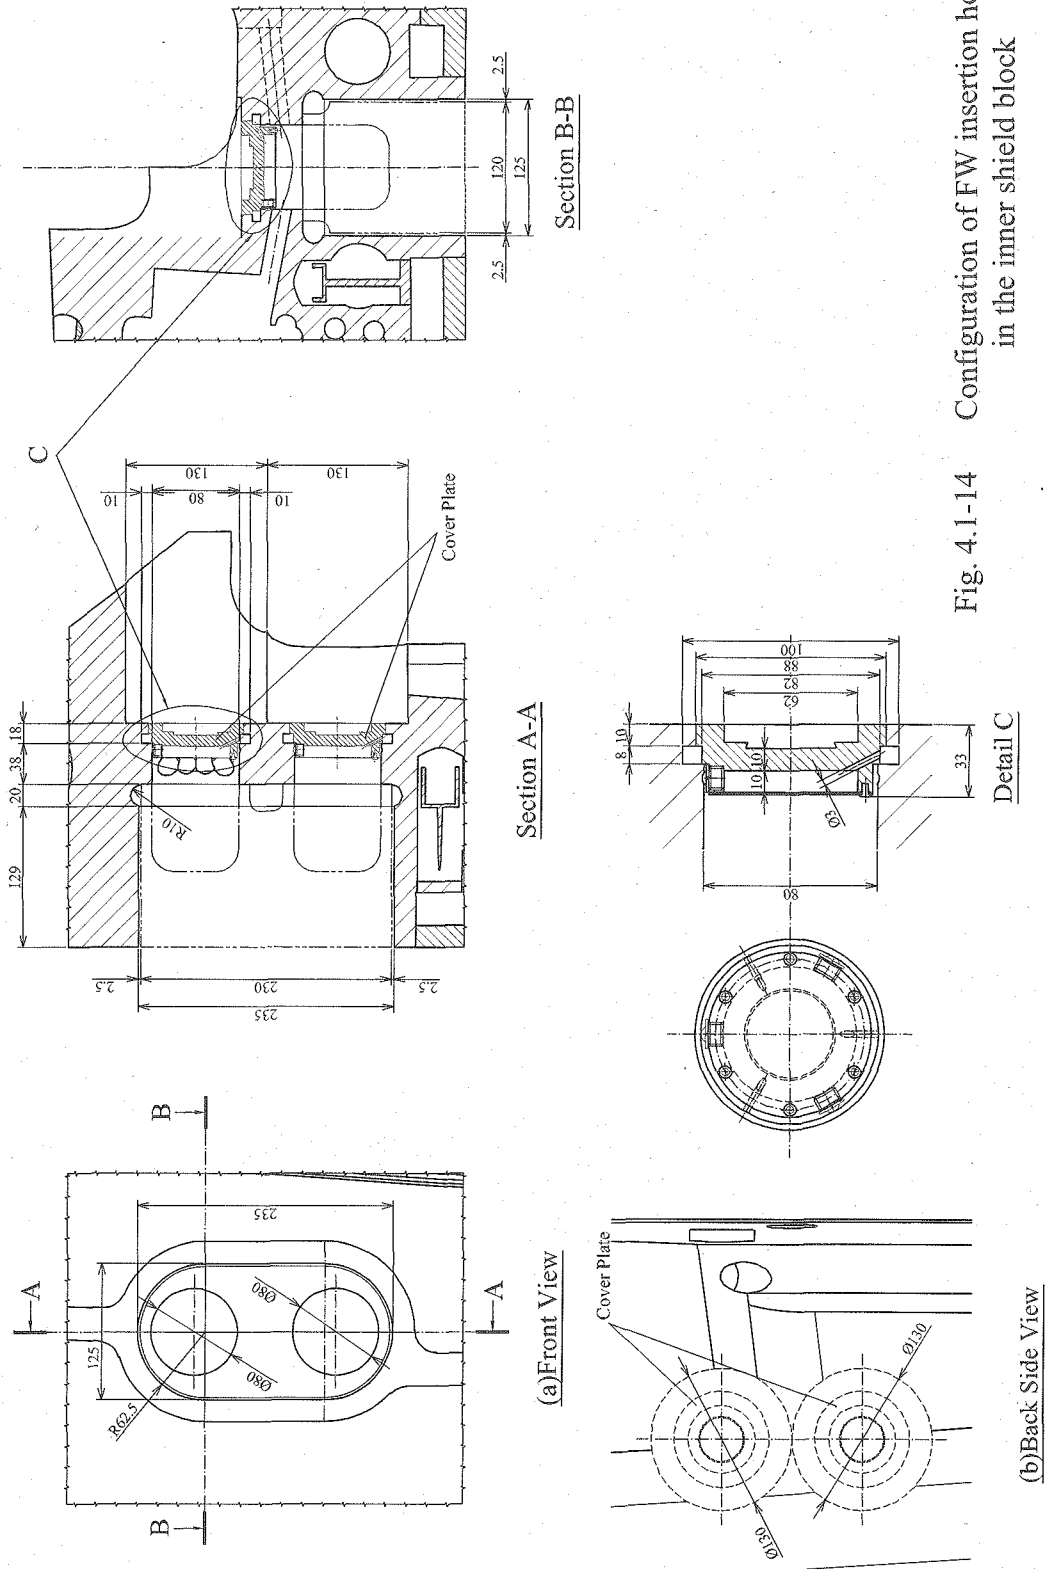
Configuration of FW insertion hole in the inner shield block
